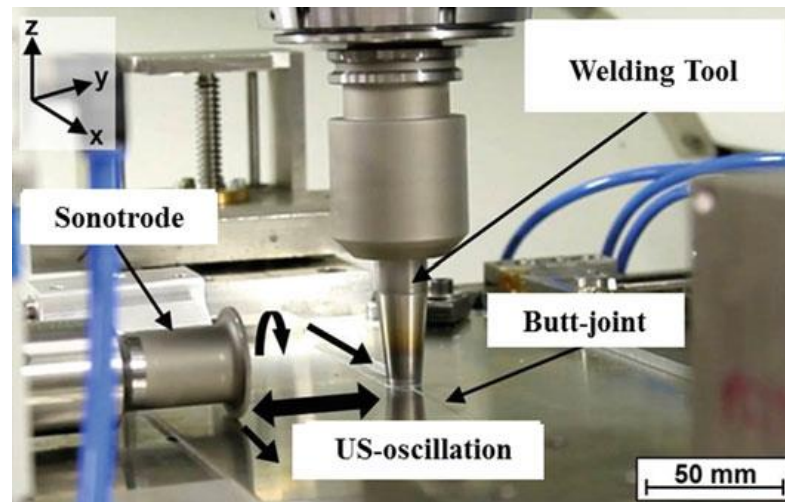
Welding by use of USE-FSW hybrid technology
